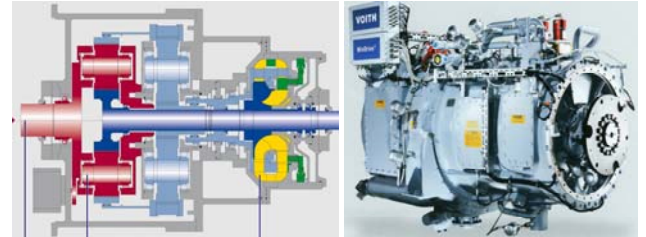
Hydrodynamic CVT gearbox used in wind turbines between main gearbox and generator [5]
